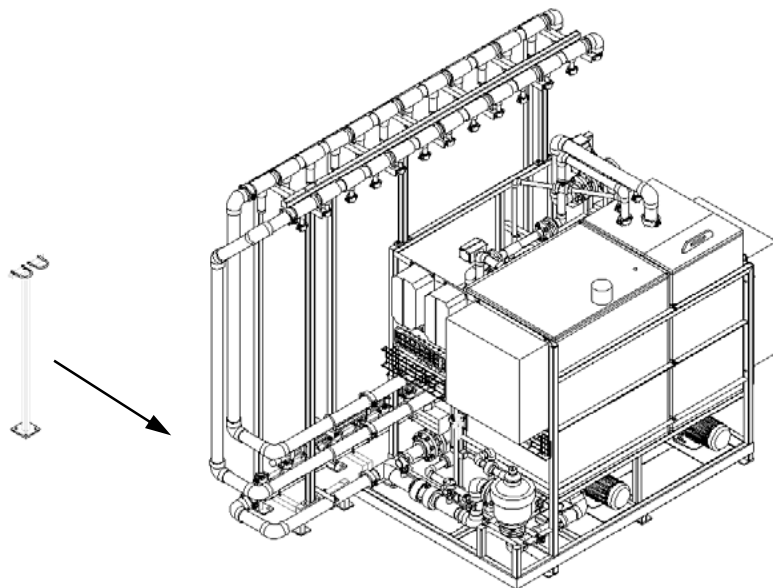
INTRACONN PIPING SUPPORT FRAME INSTALLATION
